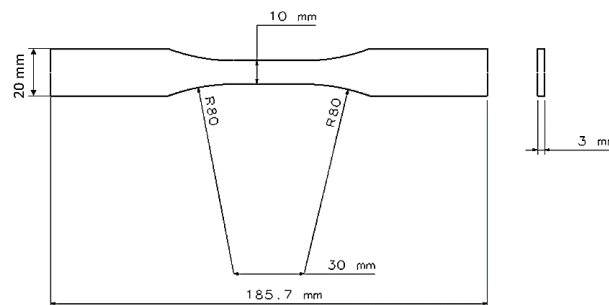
Specimens with tangentially blending fillets between the uniform test section and the ends.
